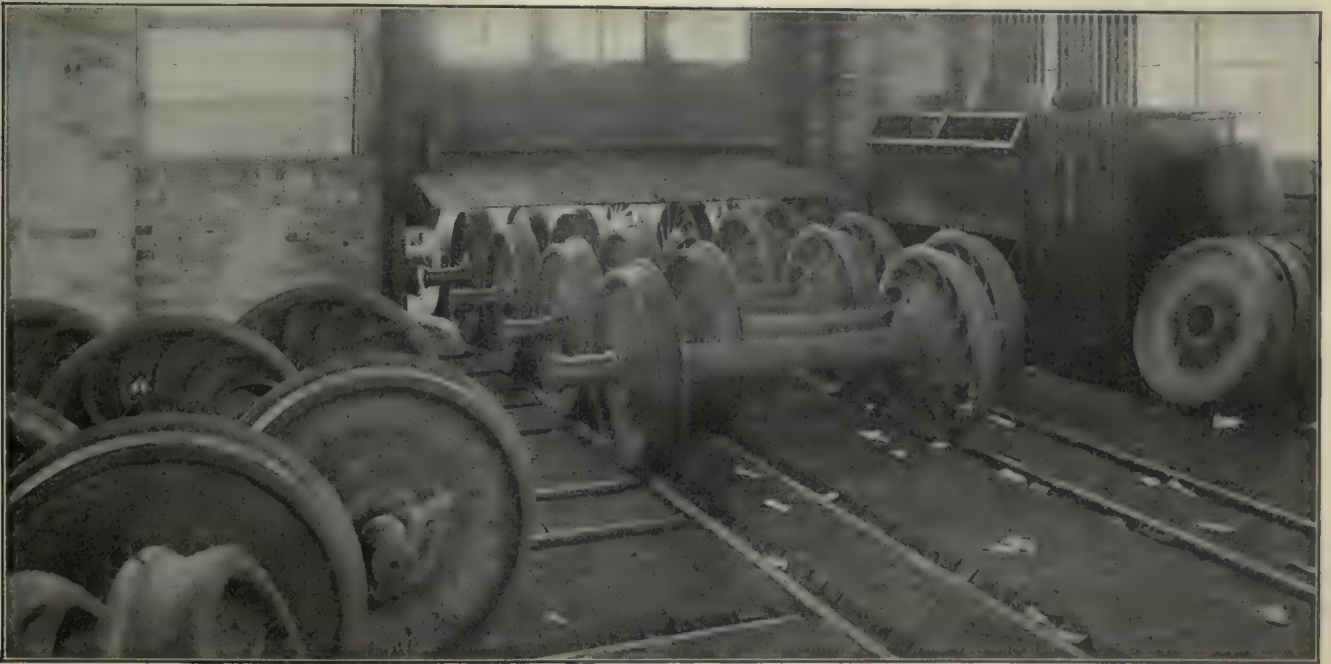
CAR WHEELS READY FOR DISMOUNTING
